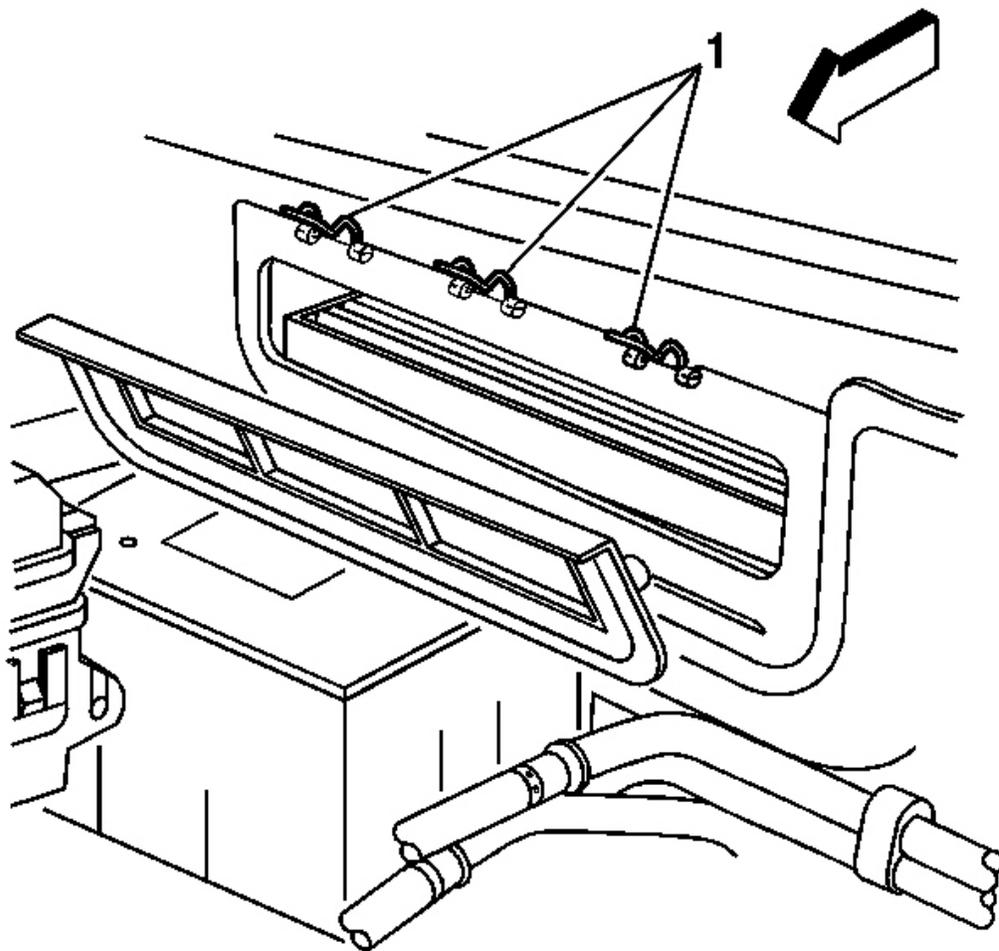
Passenger Compartment Air Filter Housing Cover & Retainer Clips
